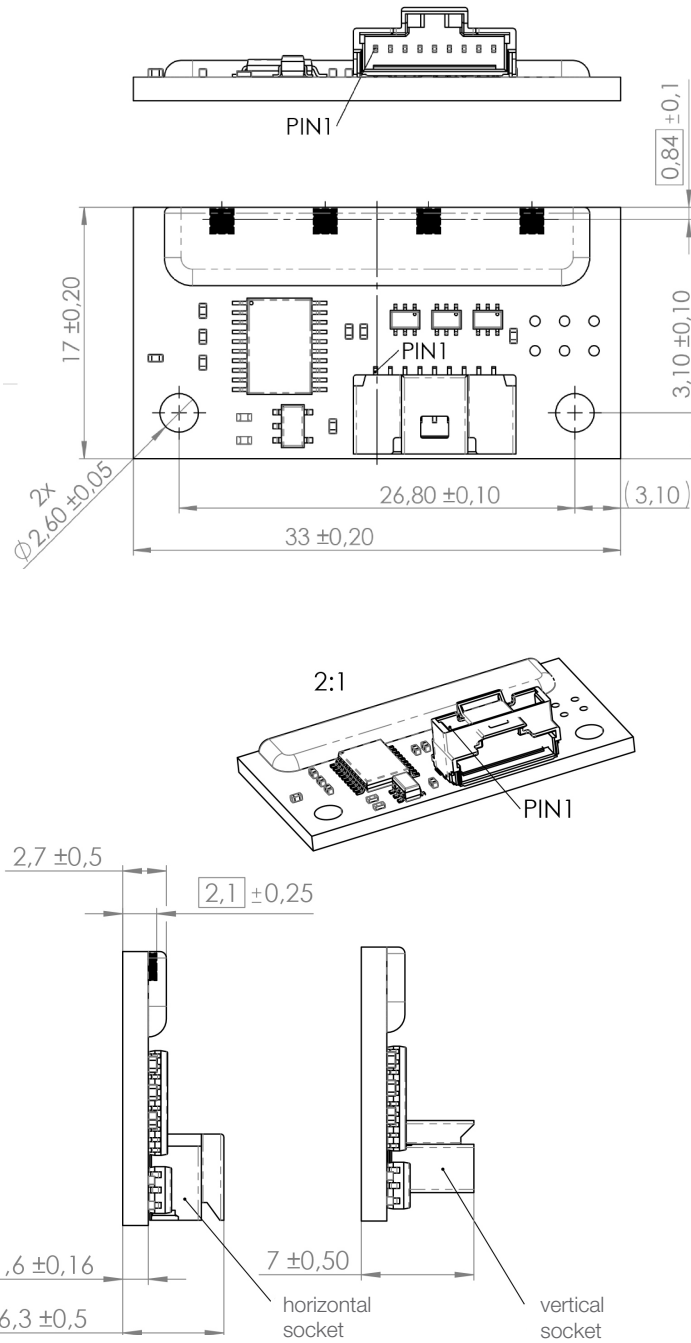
Dimensions of the sensor module (all dimensions in mm).
